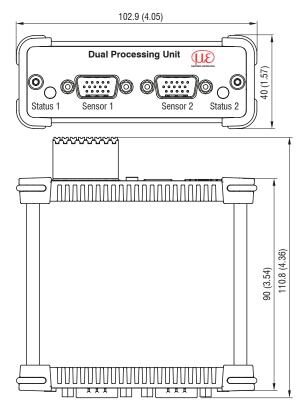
Dimensional drawing of the Dual Processing Unit, dimensions in mm
